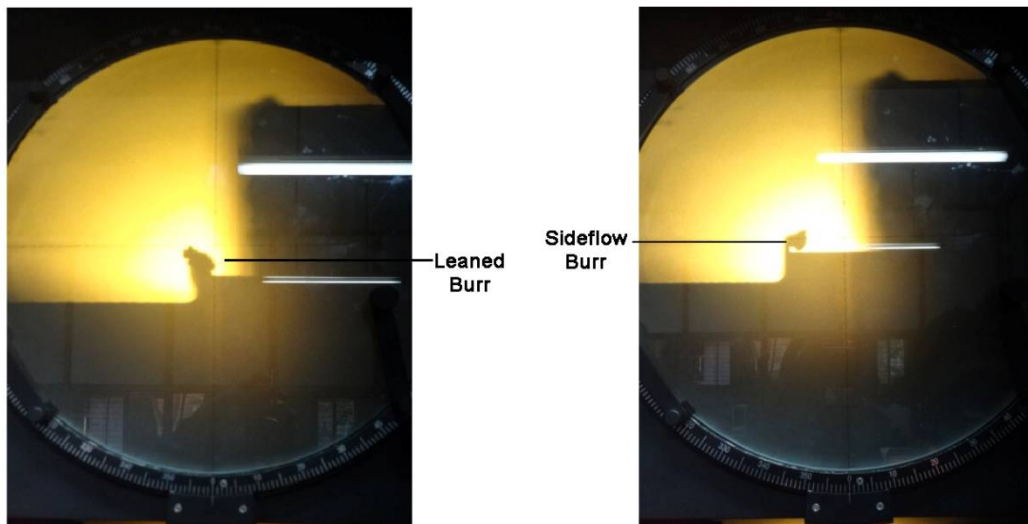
Leaned burr and sideflow burr as projected in profile projector
